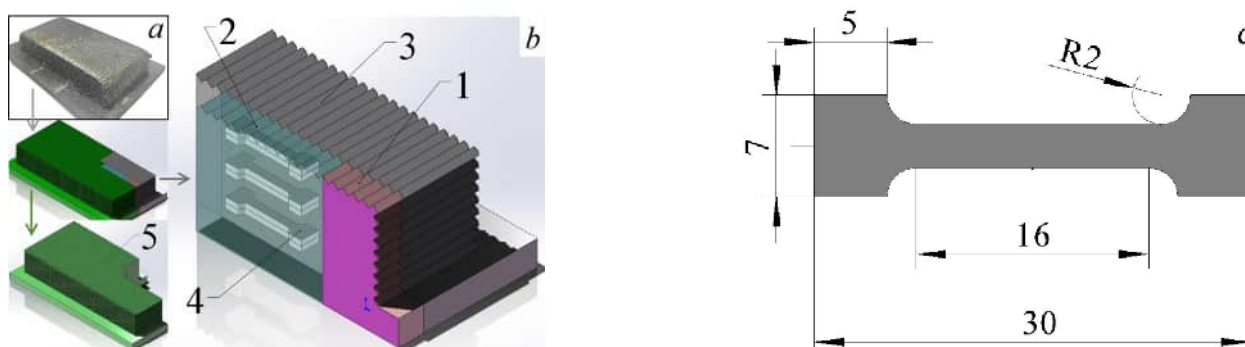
Photograph of the WAAM-fabricated specimen (a), samples cut from the specimen (b), dimensions of 2 mm thick dog bone specimens, mm (c):
